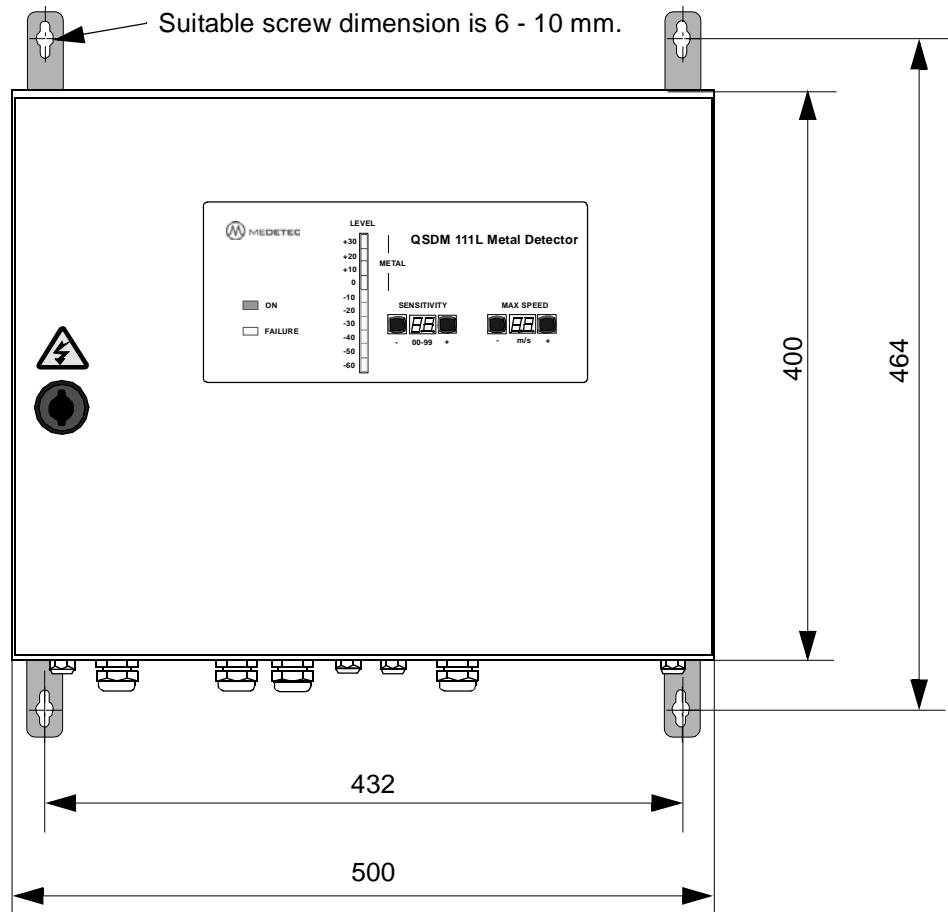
Space requirements and cut-out dimensions for the electronics unit
